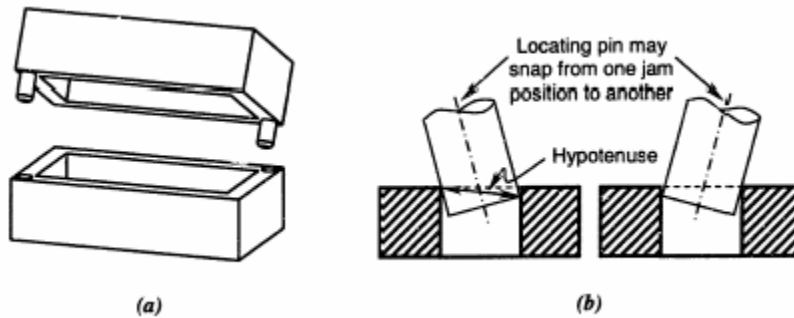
(a) Example of pin hole joints; (b) Jamming of pin joint [9]
